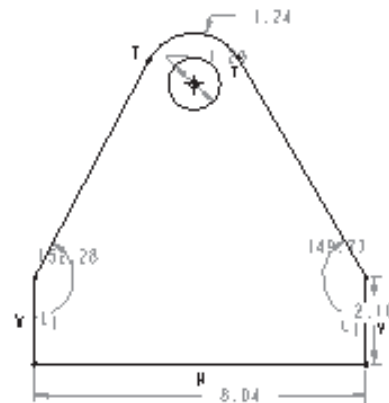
Sketch with all the entities, weak dimensions, and weak constraints
